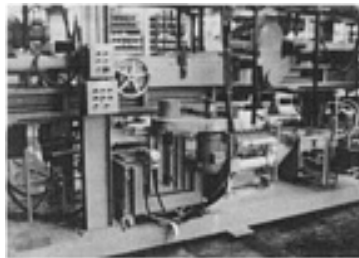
DIP SOLDERING POT IN A RADIATOR PRODUCTION LINE
